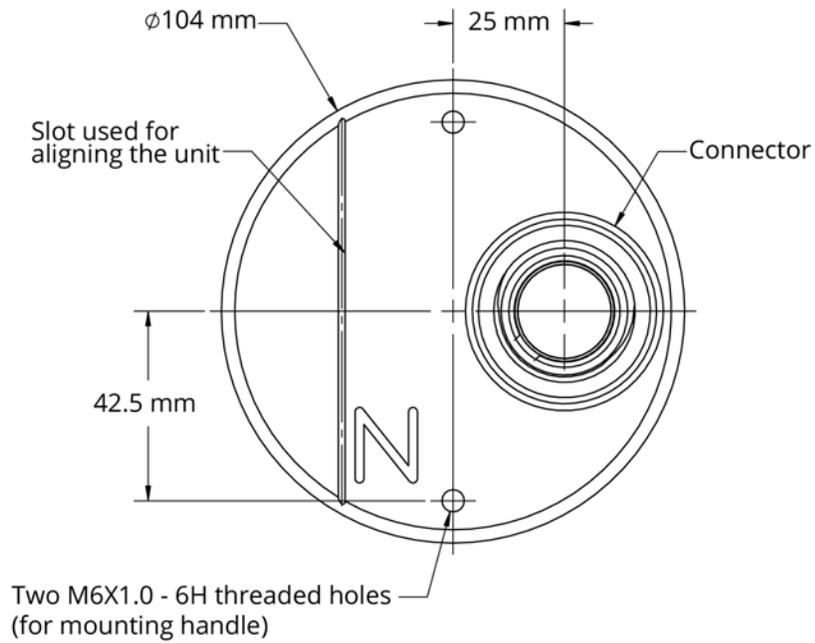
Bottom view of Trillium 120 Slim Posthole
